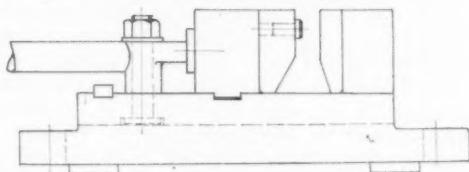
A popular design for milling small parts because the action of the cam handle gives fast opening and closing, thereby reducing operation costs
